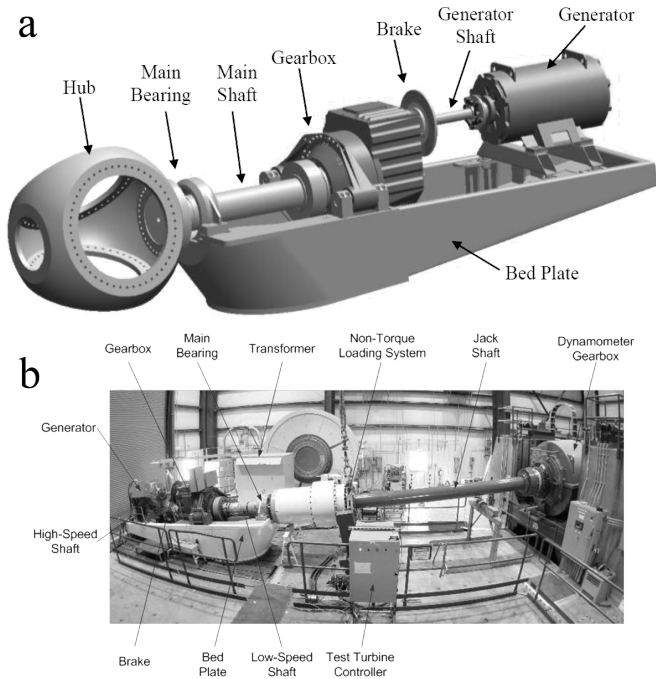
(a) Drive train configuration of the test turbine. (b) NREL dynamometer test stand with the turbine installed.
